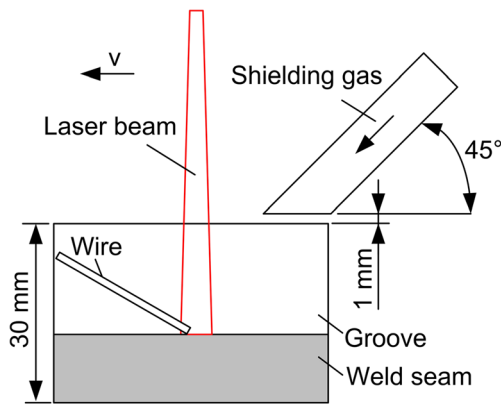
Schematic representation of shielding gas method with a large diameter tube
